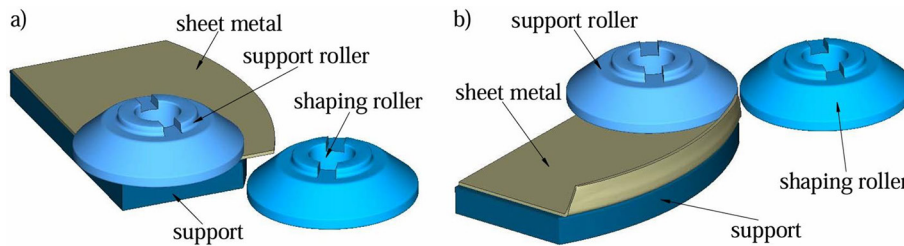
Geometric model of the incremental forming process: (a) initial positioning of the tools and semi-finished product, (b) final stage of the process
